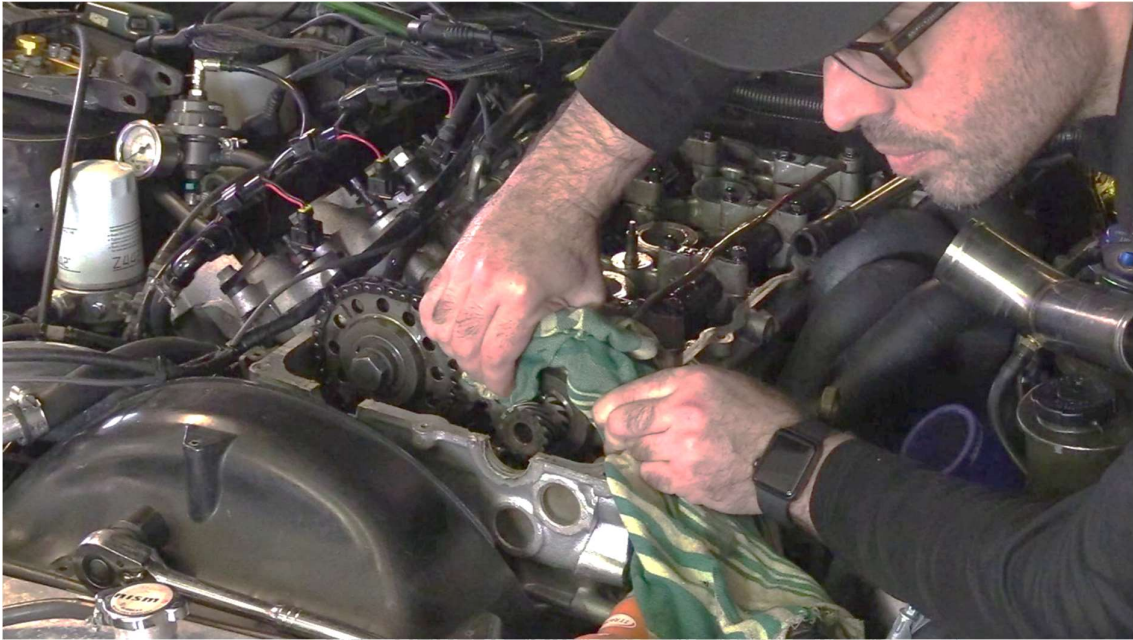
Remove the Exhaust Cam Sprocket Bolt
